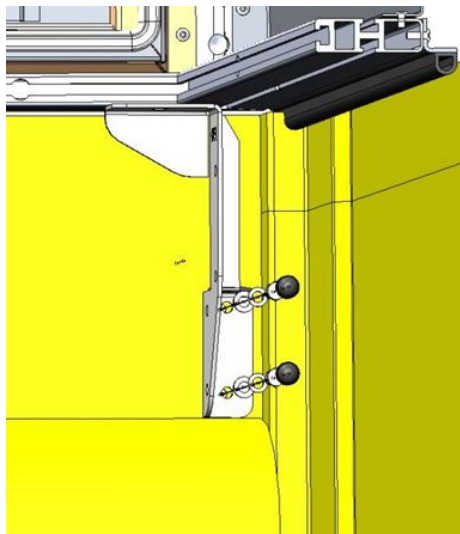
Slide 2x M8x20 hex bolts into nut slot on the camper frame
